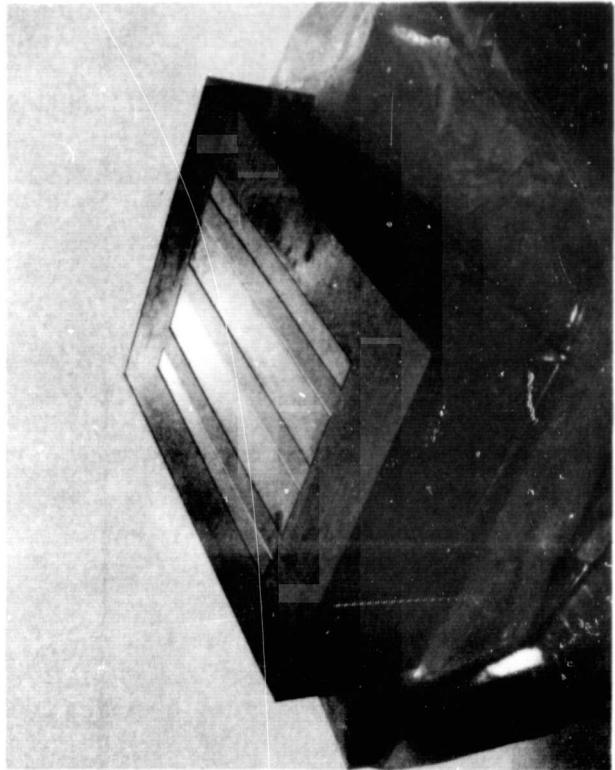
ASSEMBLY OF PACK, STEP 6
